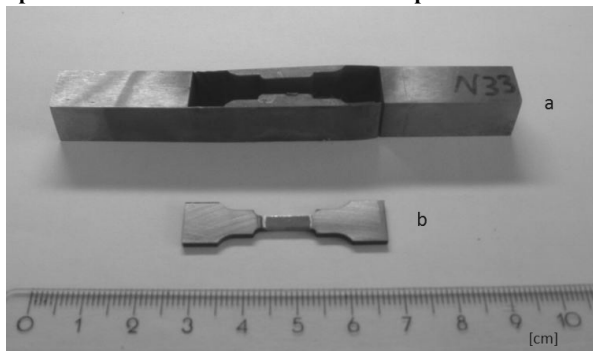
Photograph showing a) weld simulation rod with the sample removed by spark erosion and b) the sample geometry
